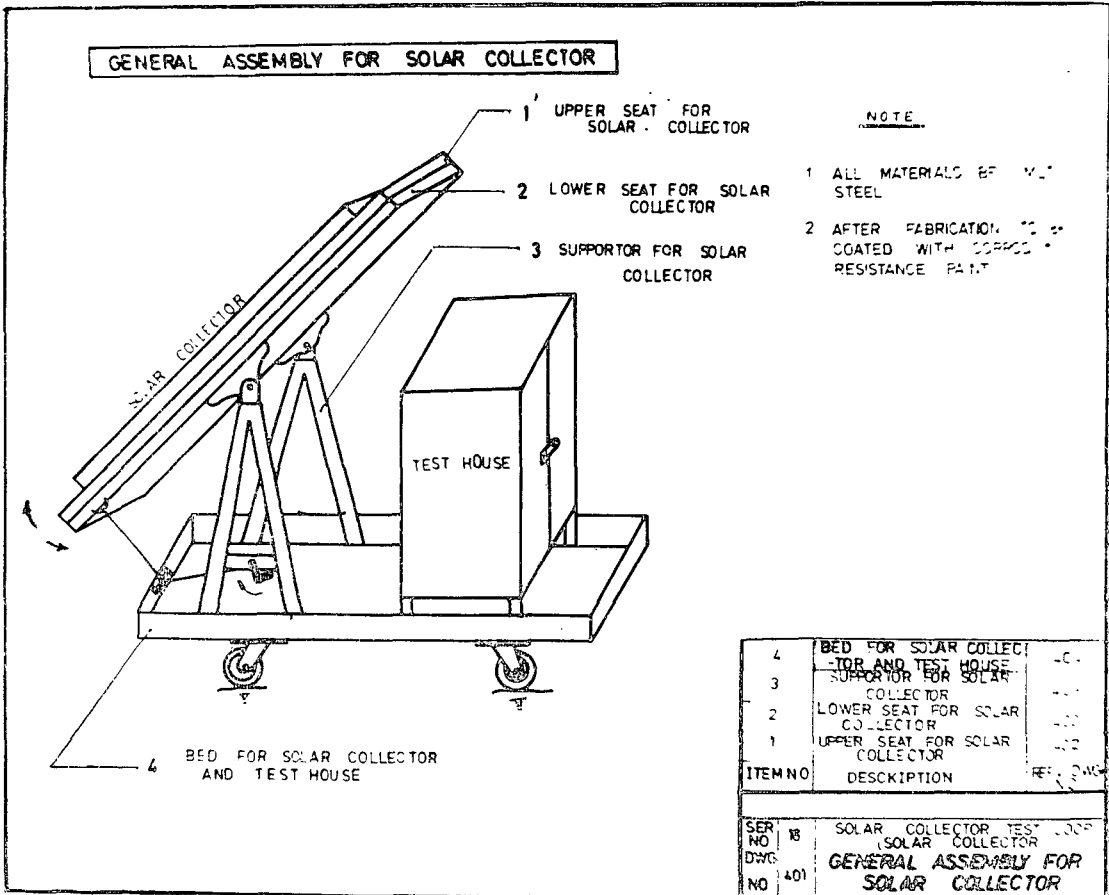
General assembly view of KAIST test stand for liquid-heating solar collectors.
